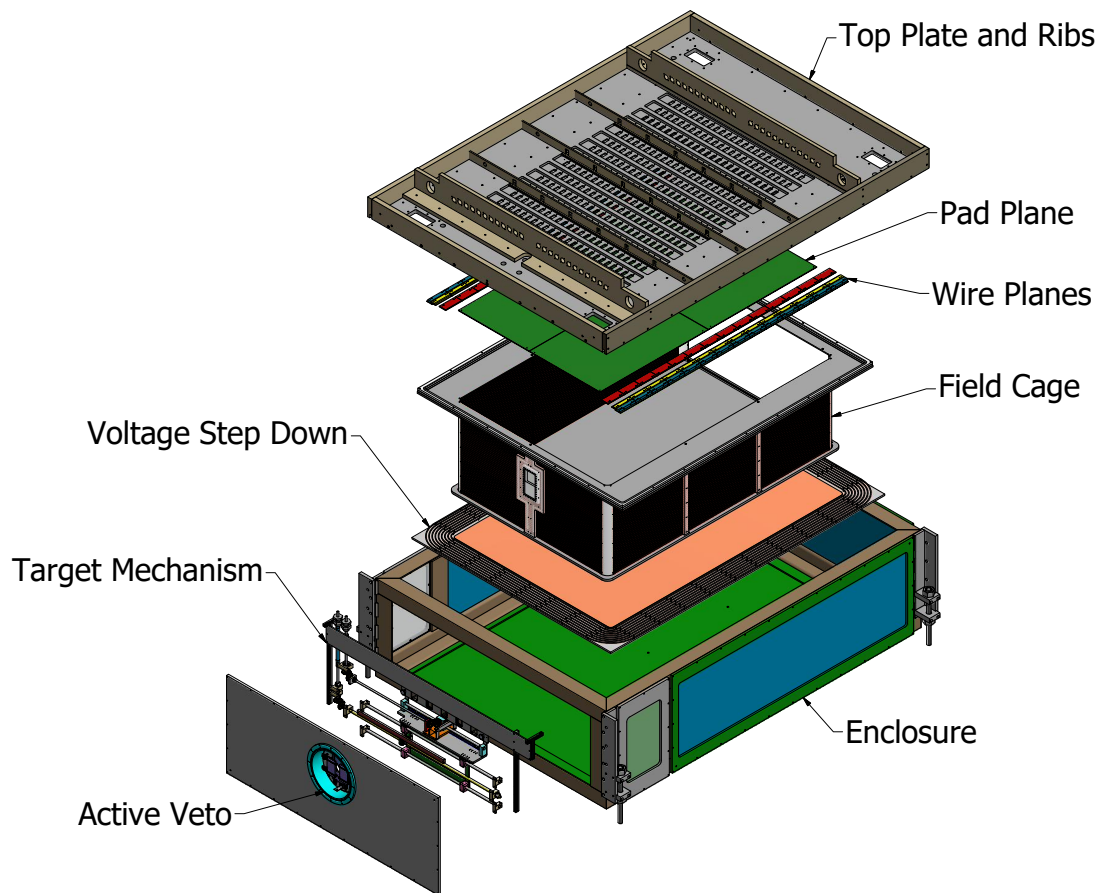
Exploded view of the SπRIT TPC. Adapted from [184].
